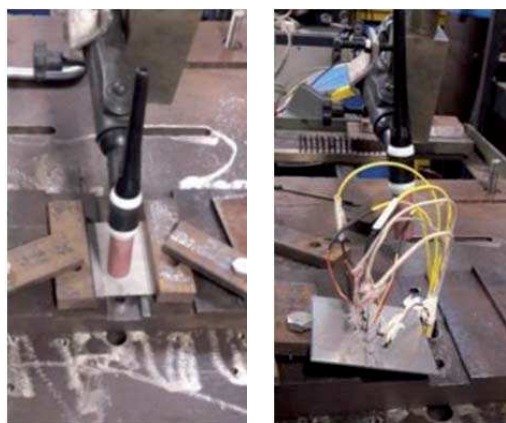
Welding arrangement for the duplex stainless steel UNS S32304 thin plates
